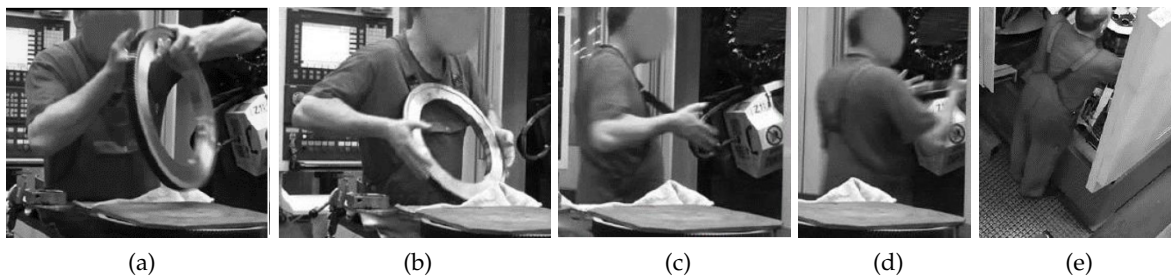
Motion analysis of loading gears into the grinding machine [24]. (a) Initiating lifting. (b) Transferring hands to bilateral holding. (c) Rotating gear while using chest as pivot point. (d) Reaching for fitting. (e) Placing product on fitting.
